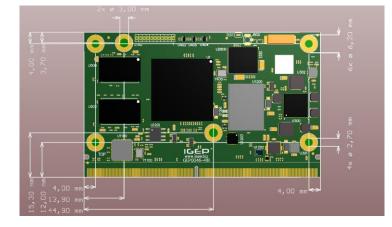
IGEP™ SMARC iMX6 side view detailed mechanical dimensions
